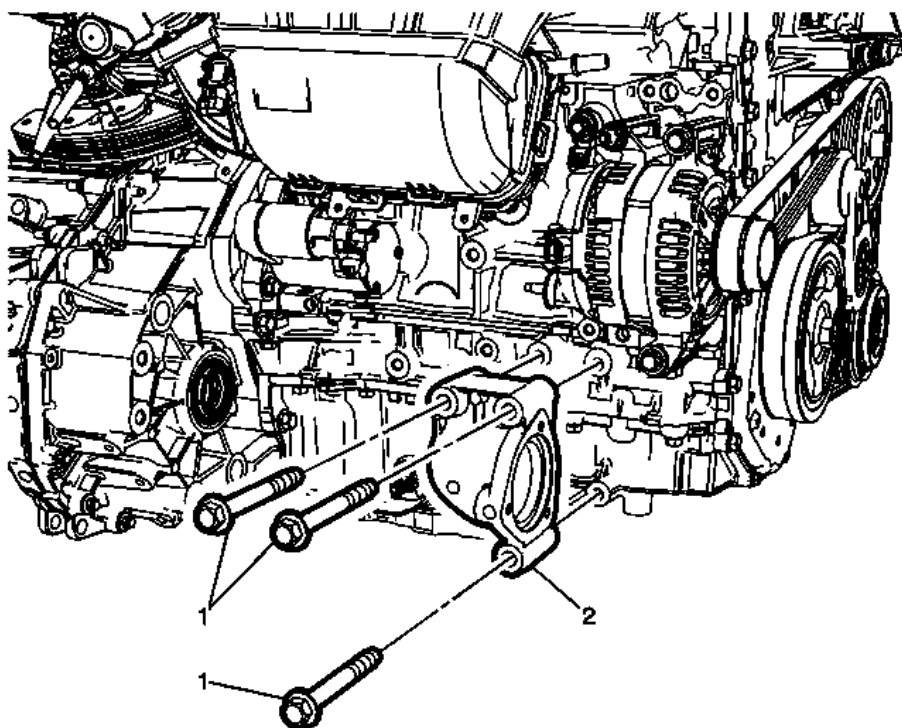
Front Wheel Drive Intermediate Shaft Bracket (LTG)
